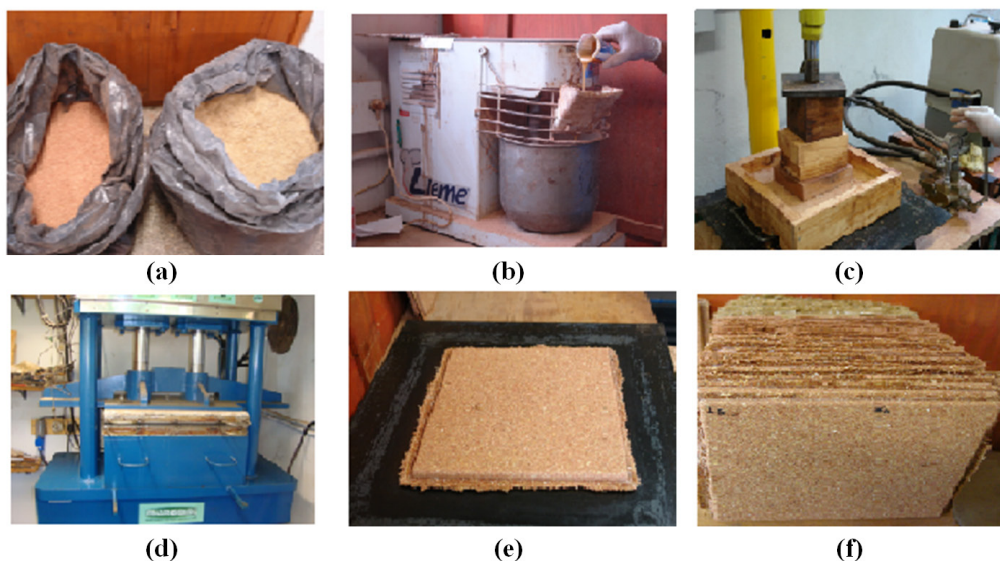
(a) Particles of both materials, (b) equipment that mixes the glue and particles, (c) pre-press (d) hydraulic press, (e) panel after pressing; (f) Panels produced.
